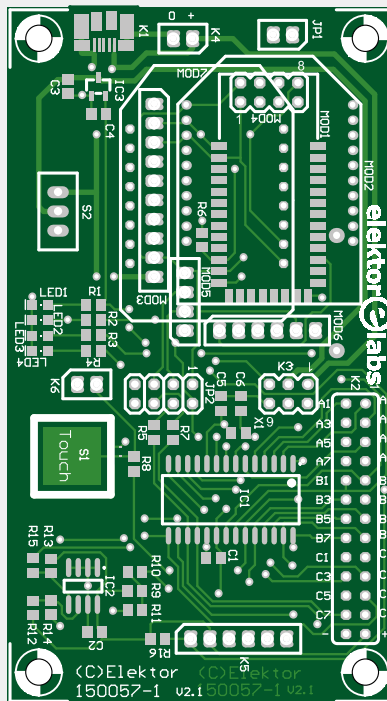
The PCB for the I/O board. The board has room for mounting seven different module types.
